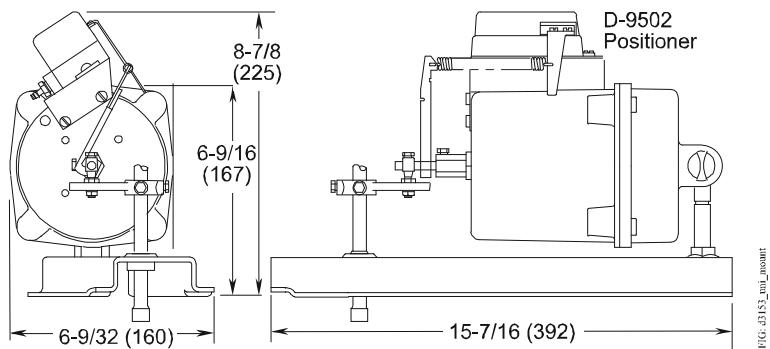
D-3153 Pneumatic Actuator with Universal Mounting Bracket Dimensions, in. (mm)
